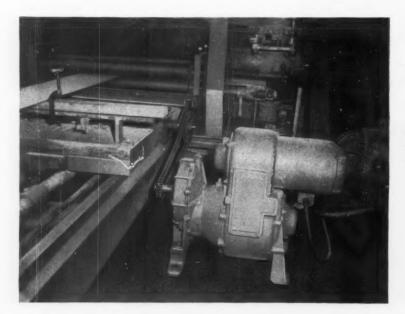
The pinch-roll feed mechanism does not require the use of a grooved chuck.
